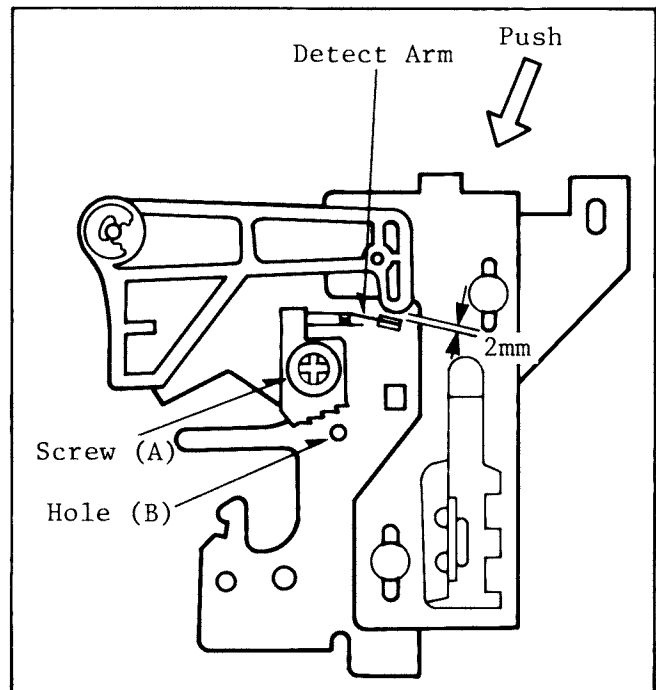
Adjustment of Cassette Lock Detector SW.
